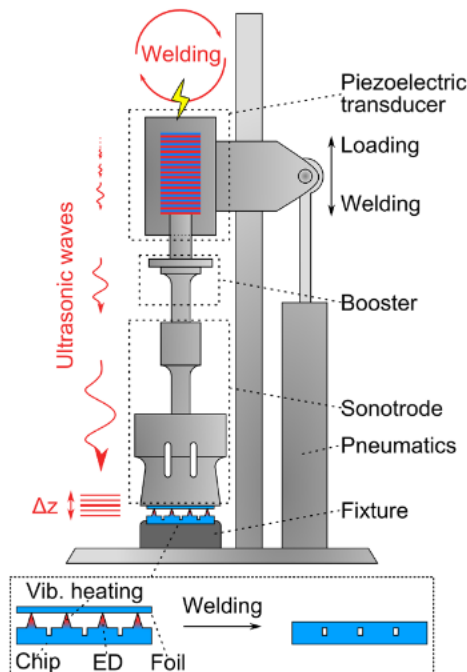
Schematic of the ultrasonic welding machine. The image is adapted from Poulsen *et al.* [112].
